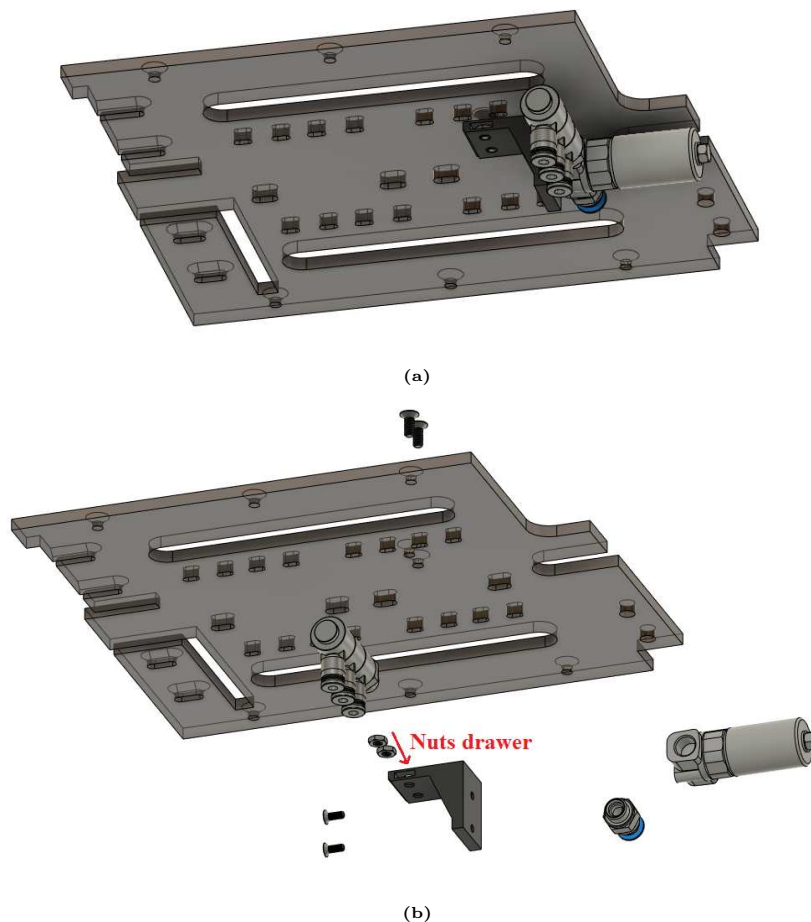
(a) Mounted ABs EV and (b) exploded view.
